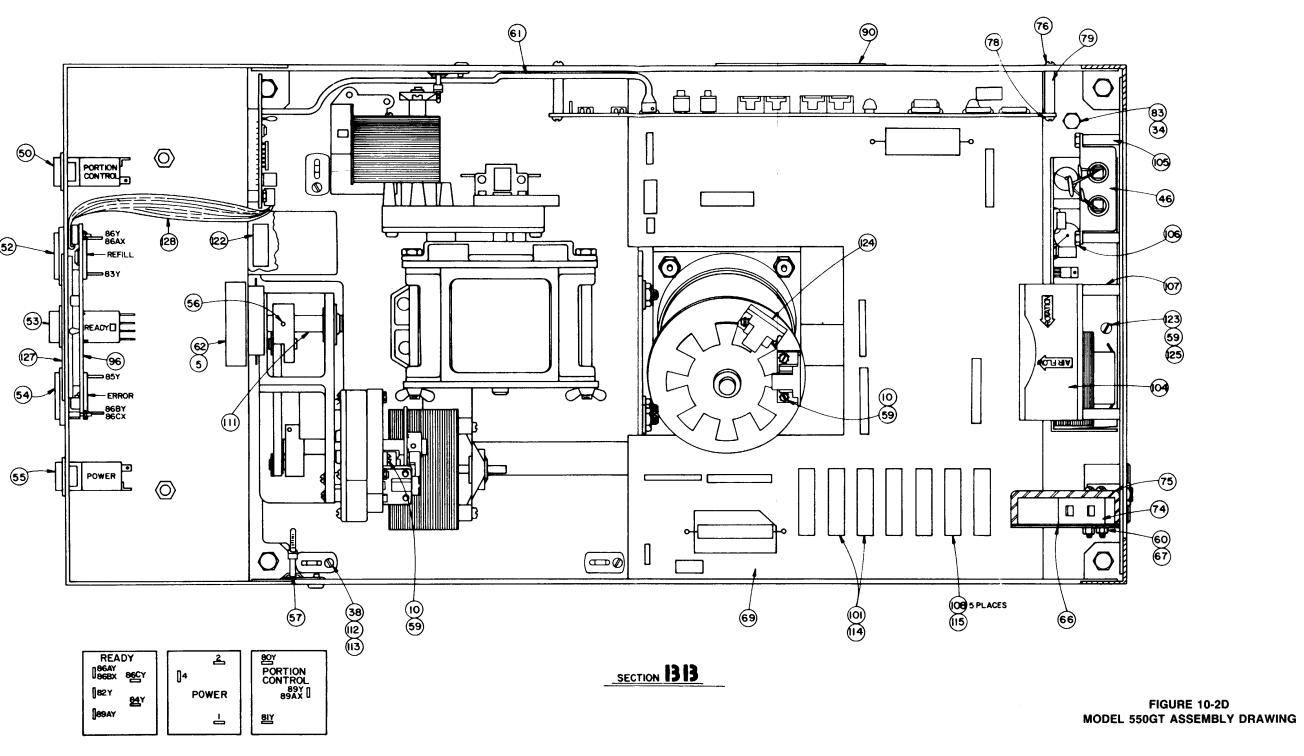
D MODEL 550GT ASSEMBLY DRAWING
